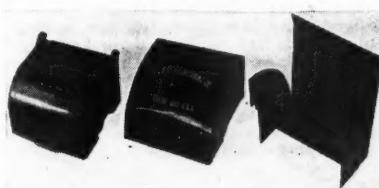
Welded steel hood (center) costs 52% less than former design (left). How welded hood is made is shown at right.
